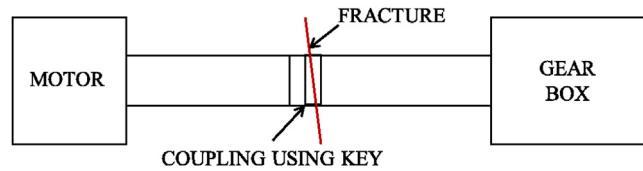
Schematic of shaft and coupling assembly indicating the location of failure.
